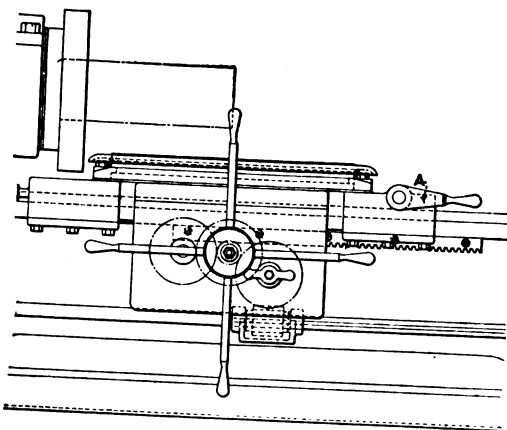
APRON GEARS AND TURRET RELEASE OF DODGE LATHE
